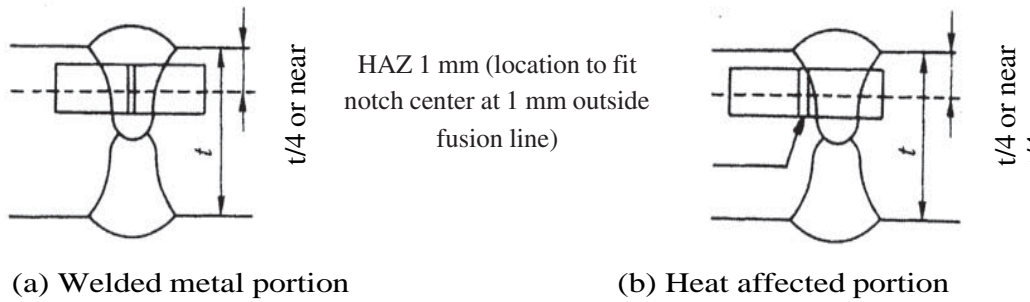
Impact Test Piece (Location to Collect Groove Welding Test Piece)
